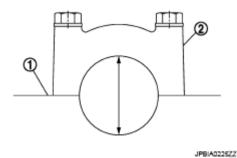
Identifying Lower Cylinder Block Courtesy of NISSAN MOTOR CO., U.S.A.
